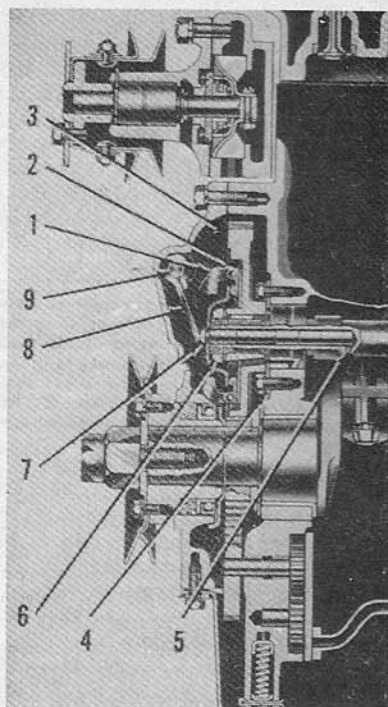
Models TE20 and TO20 governor and camshaft gear installation. Governor weight overhaul requires removal of timing gear cover. Model TO30 is similar.
